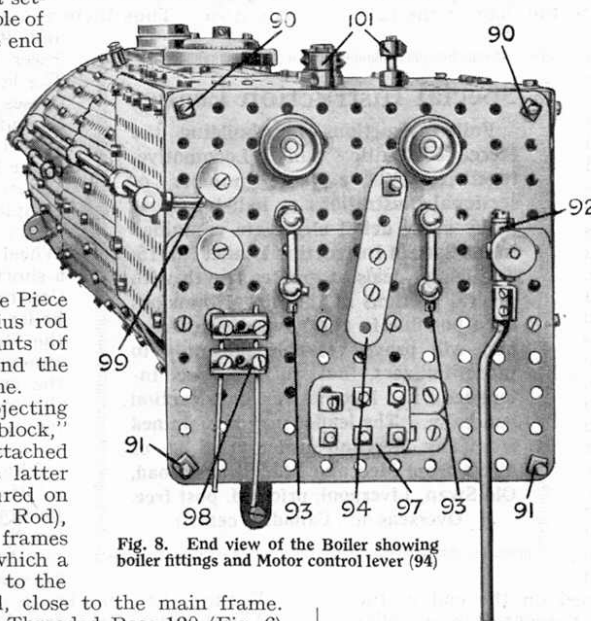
End view of the Boiler showing boiler fittings and Motor control lever (94)
